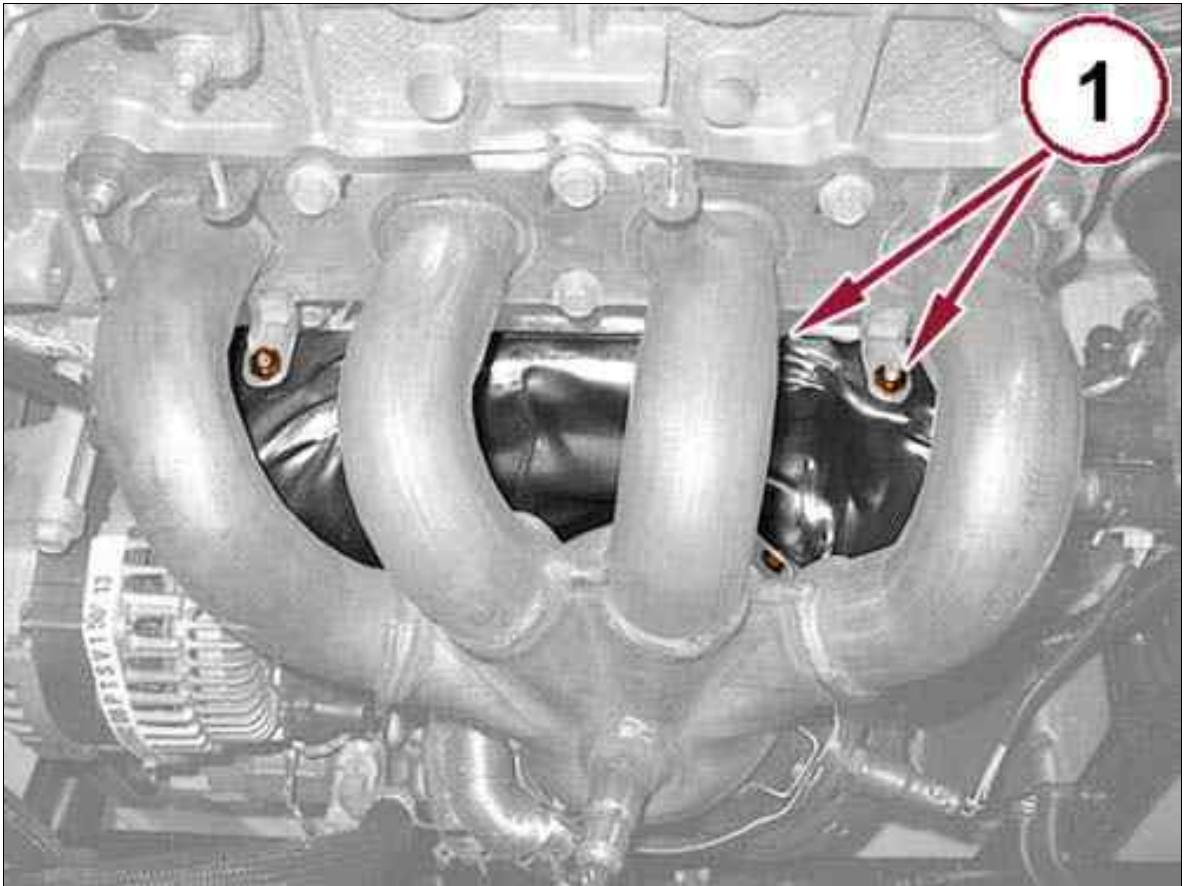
Upper Heat Shield, Nuts & Wire Harness Retainer
